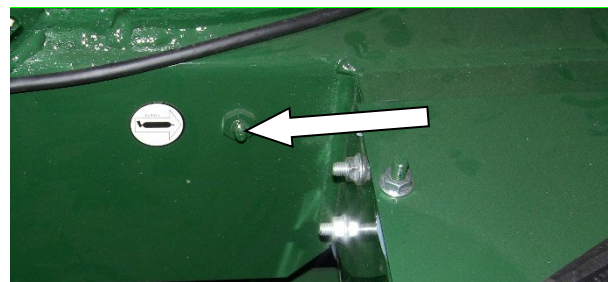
Gearbox Lubrication Upper Bearing Remote Location (next to Supplement Hopper).
